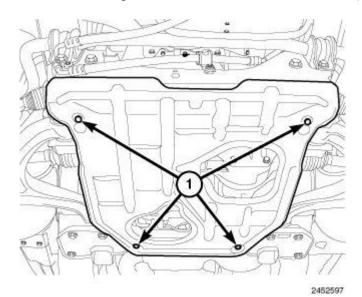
Lower Splash Shield Retaining Bolts Courtesy of CHRYSLER LLC
